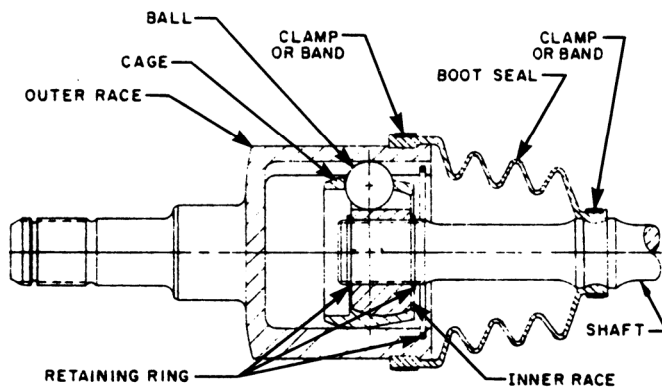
DOUBLE OFFSET OR DO UNIVERSAL JOINT (END MOTION TYPE)
